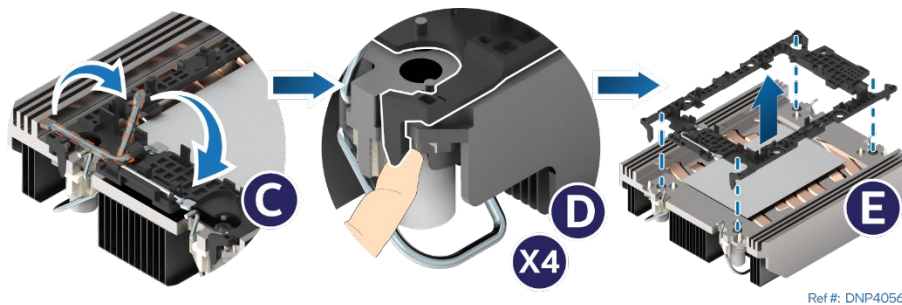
Processor Carrier Clip Removal from PHM Assembly
